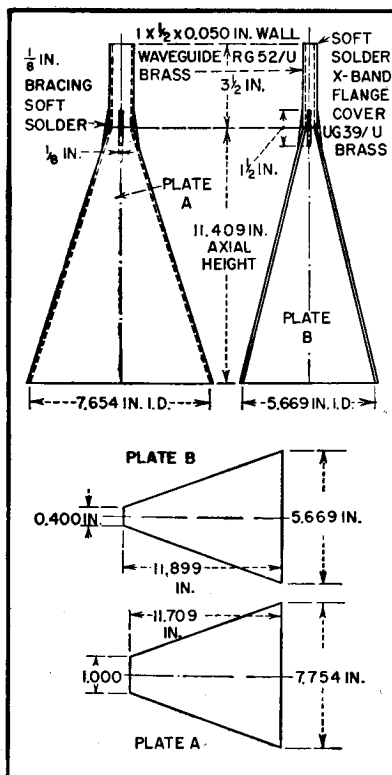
Typical construction drawing for a gain-standard horn. Plates are made from 0.50 in. sheet brass
